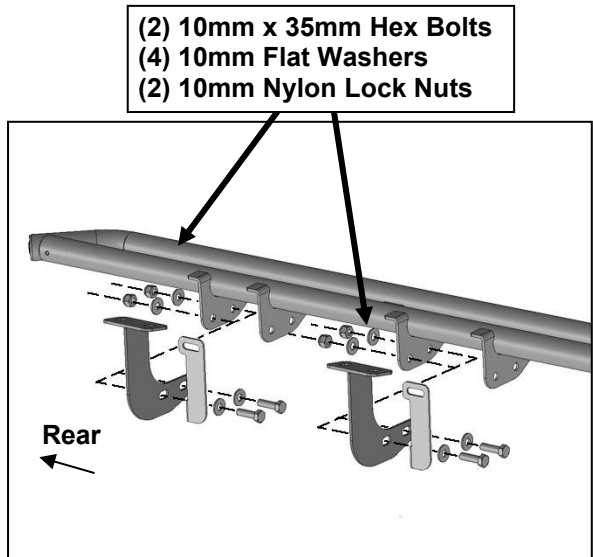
Attach driver/left #2 Brackets to front facing side of mounting tab on driver/left Running Board
